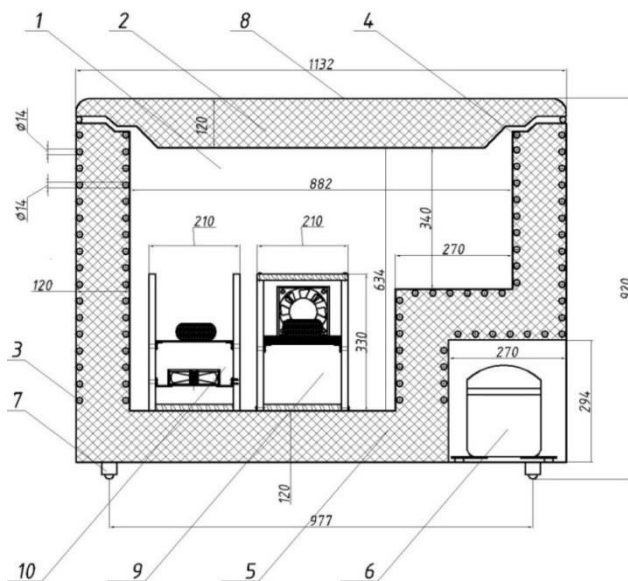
Laboratory bench: 1 - internal chamber; 2 - cooling chest lid; 3 - condenser; 4 - vaporizer; 5 - insulating layer; 6 - compressor; 7 - wheel support; 8 - casing; 9 - tunnel with metal plates; 10 - tunnel with metal grid.
